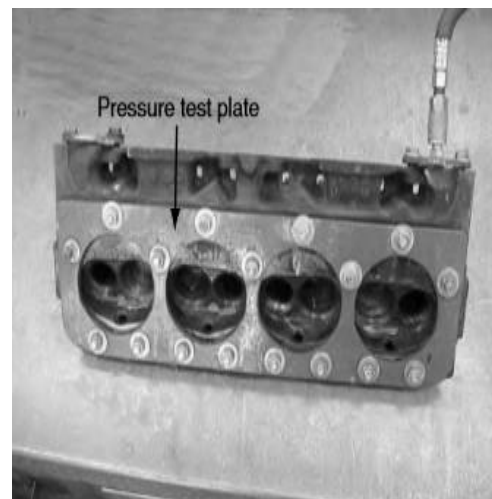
A custom-fitted pressure test plate installed on a cylinder head.
